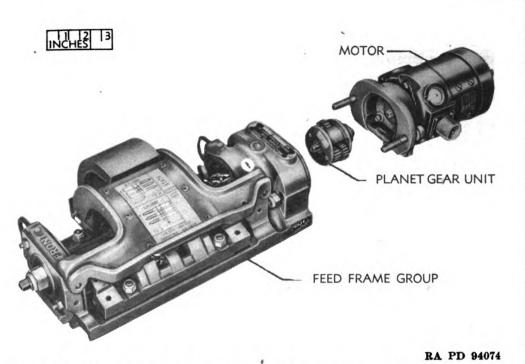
20-mm left-hand feed mechanism M3—Assembly of motor and planet gear unit to feed frame.
